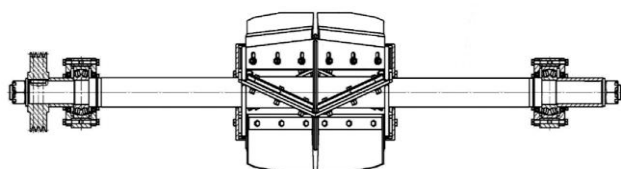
Four-section rotary mixer (top view): (1) electric motor; (2) cable rotor; (3) blade rotor; (4) V-belt transmission; (5) tension roller
